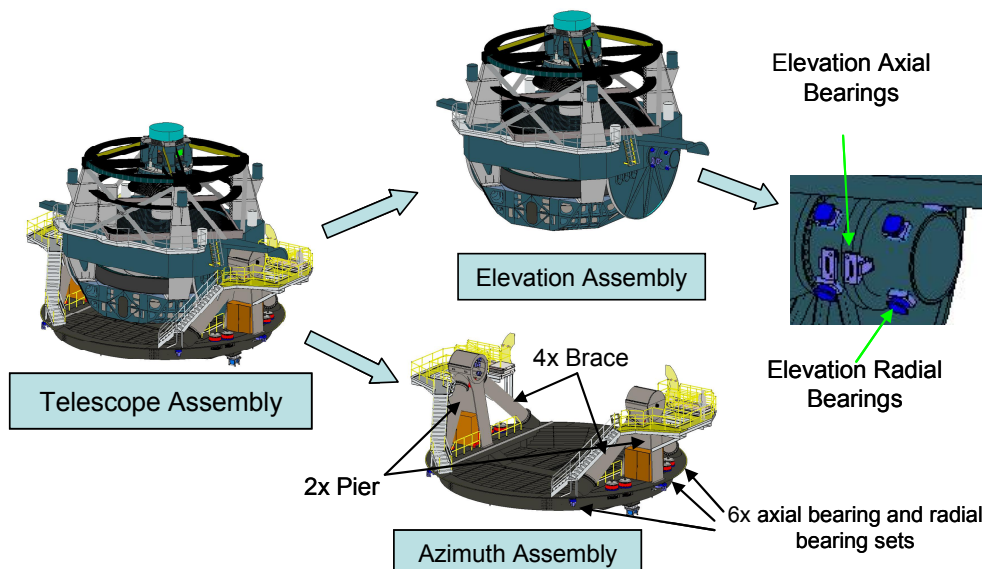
Hydrostatic bearing configuration and locations on the telescope structure
